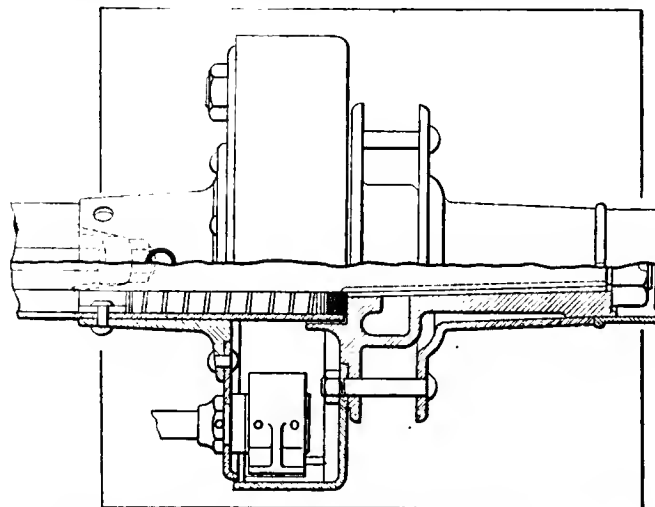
Hub for live rear axle showing Hyatt roller bearings and felt closure, also close nesting and light weight.
